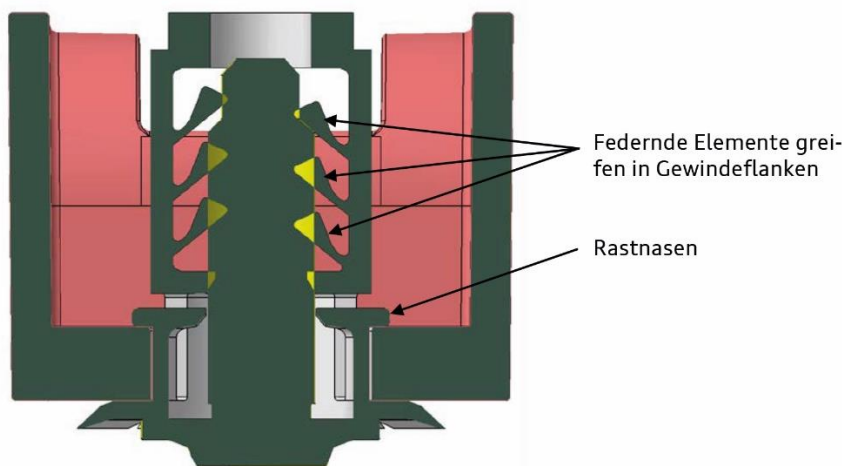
Sectional view of plastic clip with holder and threaded bolt
